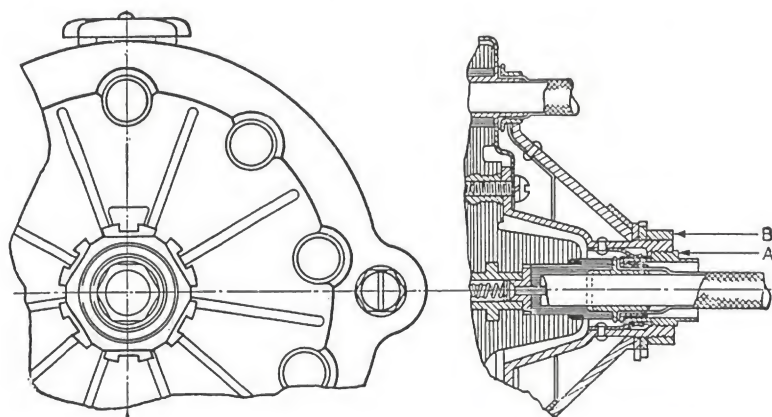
SECTIONAL VIEW OF DISTRIBUTOR AND CLAMPING PLATE
